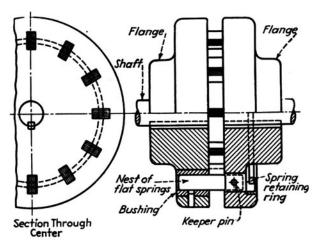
In this Smith & Serrell coupling, flexibility is obtained by laminated pins built up of tempered spring steel leaves. Spring leaves secured to holder by keeper pin. Phosphor bronze bearing strips are welded to outer spring leaves and bear in rectangular holes of hardened-steel bushings fastened in flange. Pins are free to slide endwise in one flange but are locked in the other flange by a spring retaining ring.
